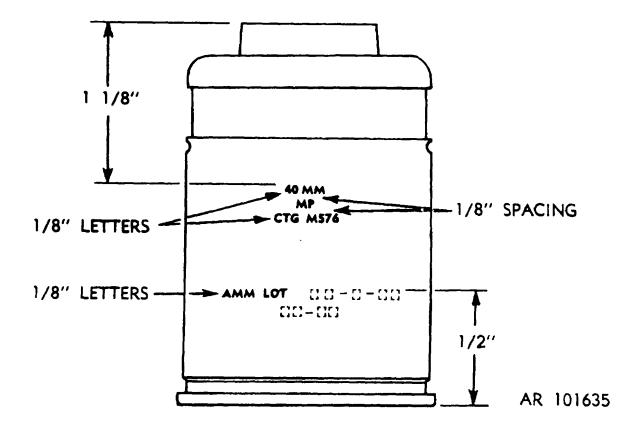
Typical marking for 40mm grenade cartridge M576.
